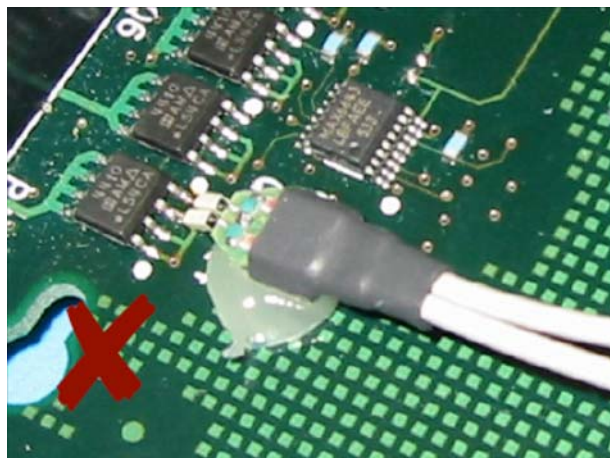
Incorrect securing method because glue is placed on the probe head tip
